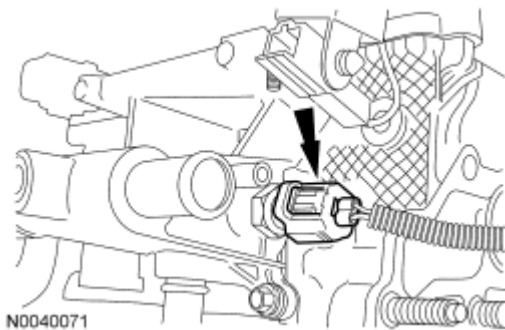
Locating Coolant Temperature Sender Electrical Connector
